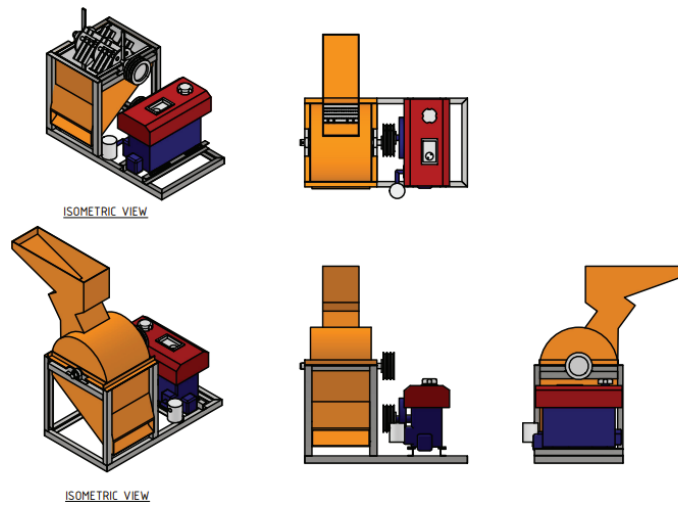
Sketch of a 3-Dimensional Grinder Machine for Processing Pottery, Tile, and Brick Waste.
